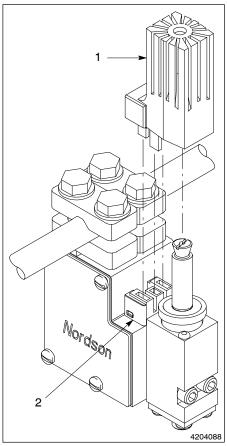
Removing the Gun Module Coil from the Manifold
